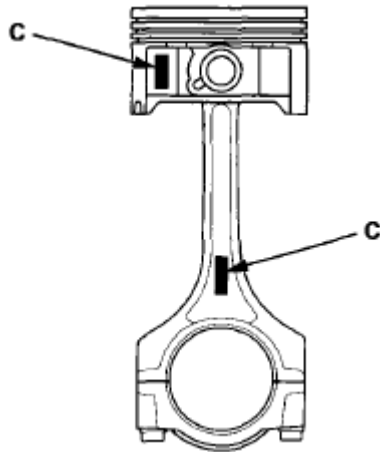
Identifying Embossed Marks On Piston And Connecting Rod
